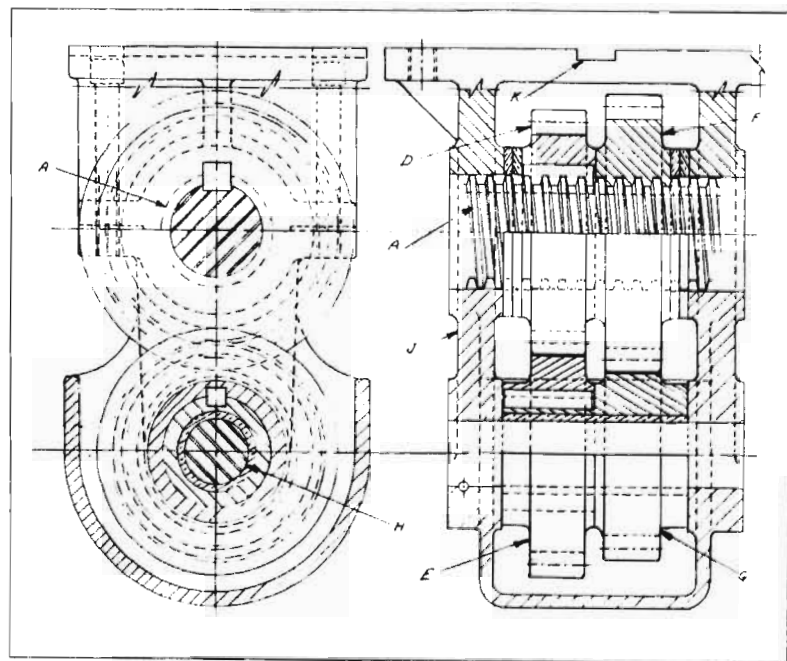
Each of the boring-bar supports has a reduction gear train driving from the keyway in lead-screw *A*. Gear *D* carries the key but only slides over the lead-screw. Gear *F* drives the nut forward via the reduction gear train from *G* to *E*.
